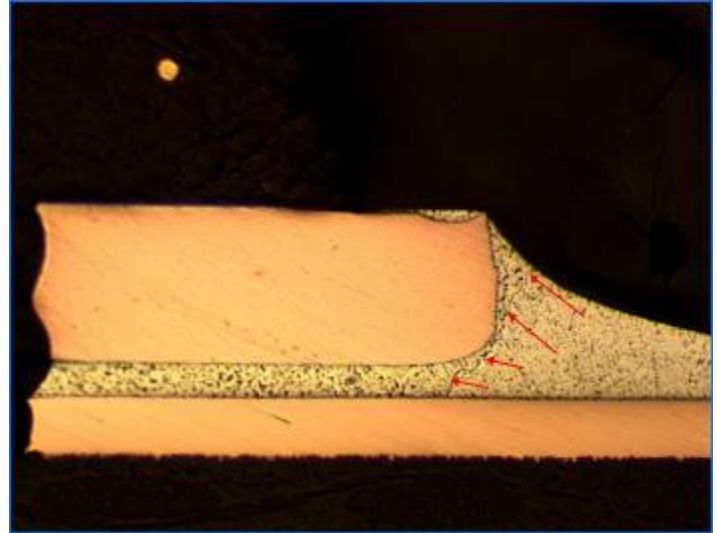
cross section, SN63, U54, right pad solder crack, 100x
